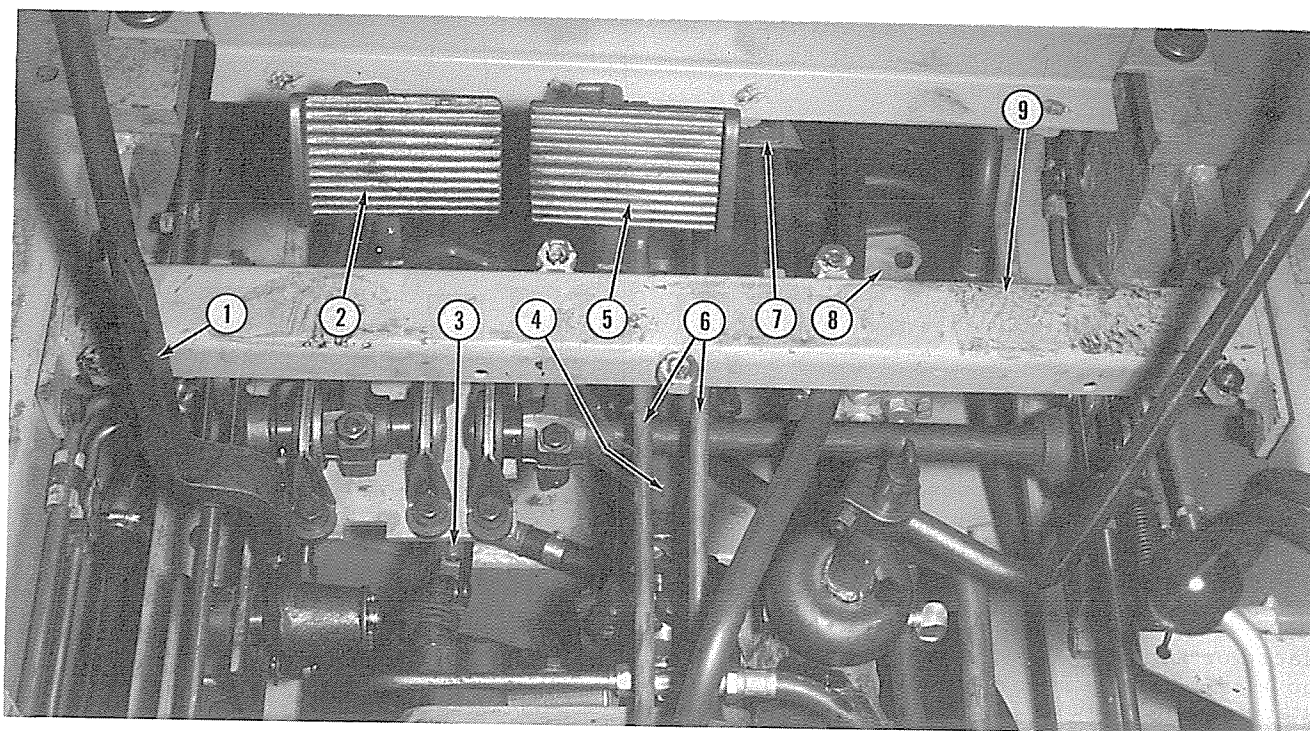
CLUTCH INSTALLED -- FLOOR PLATES REMOVED
